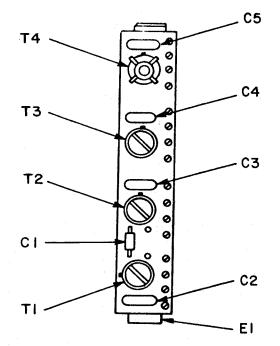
25 MHz Subassembly A2A4A15, Component Locations
